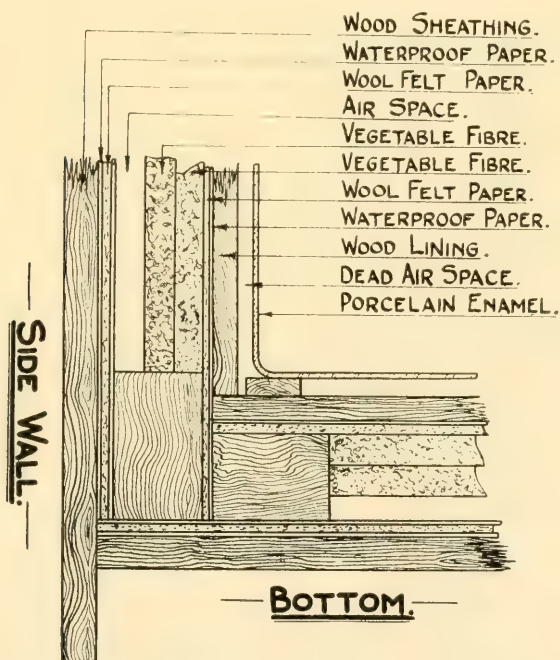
TYPICAL REFRIGERATOR WALL CONSTRUCTION
